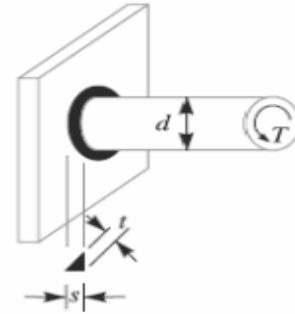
Circular fillet weld subjected to torsion.
